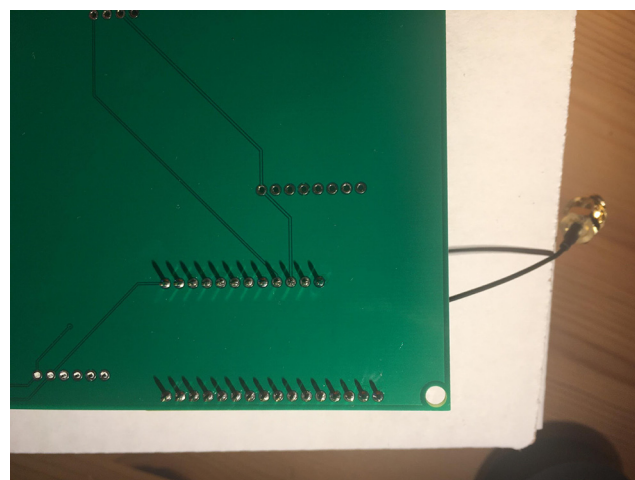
The bottom view of the PCB after soldering the Data Logger with the RTC Board.
